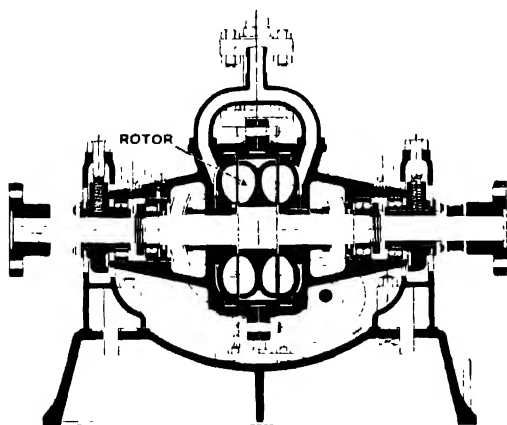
WATER BRAKE DYNAMOMETER. Sectional drawing of a rotor carried on a shaft and running in a fluid filled casing. Courtesy of Heenan & Froude, Ltd.
